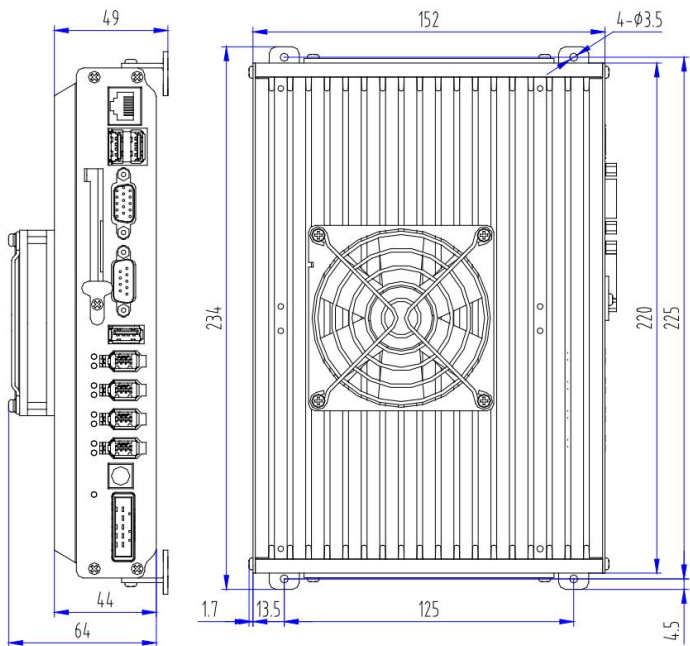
Dimensions of HPC-100 IPC Unit - Horizontal
